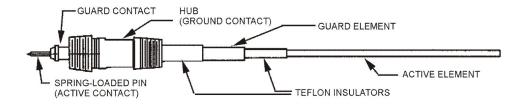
Standard L853 Probe, Descriptive Drawing
